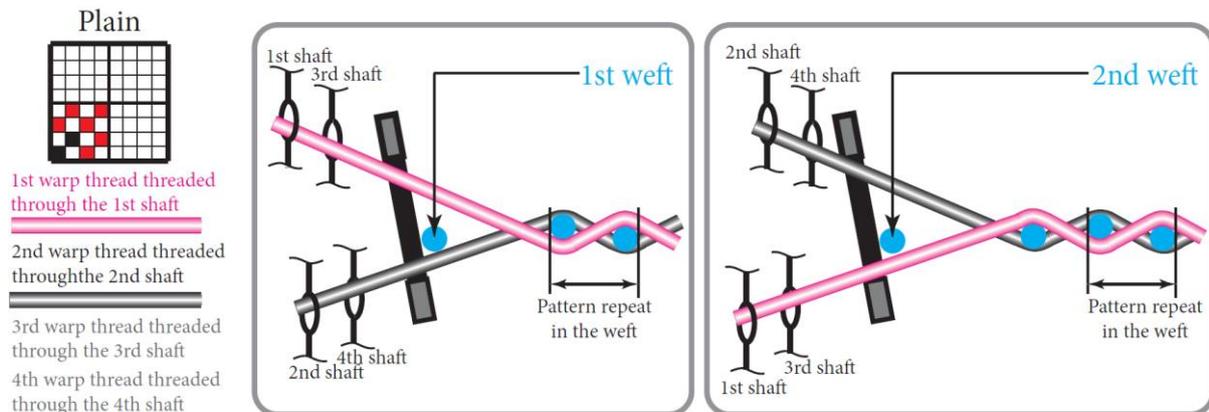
Diagram of the position of shafts in making a plain weave using four shafts with plain draft
